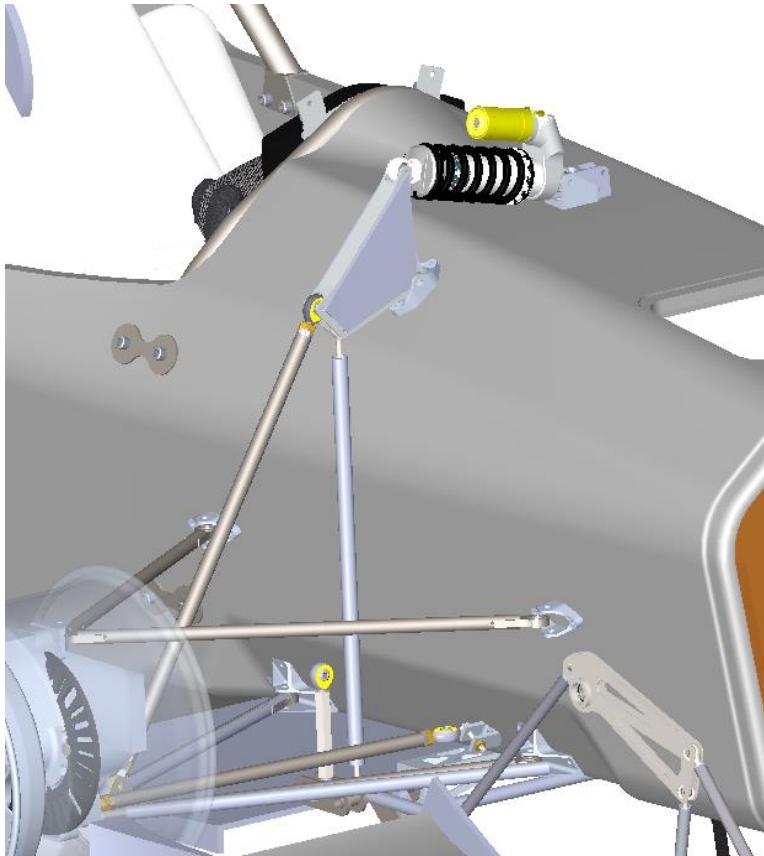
Front suspension package. Lower control arm is mounted to boss, rocker is mounted to planar surface, and shock is mounted to a flat top.
